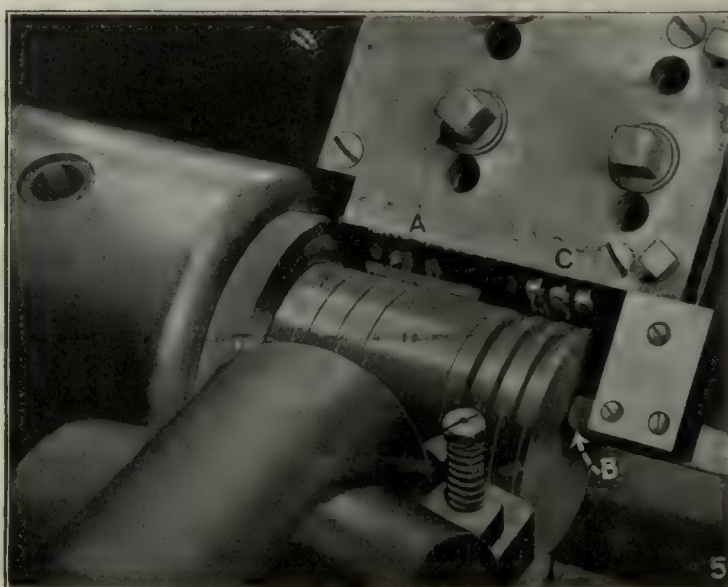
GROOVING FOR OIL AND PISTON RINGS
